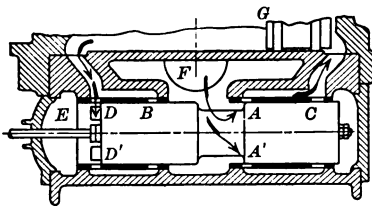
"IDEAL" SOLID PISTON VALVE
